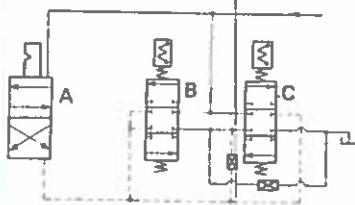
Arrangement of two servo valves for reversing at top and bottom of stroke with automatic stopping at top of stroke should either valve fail.
